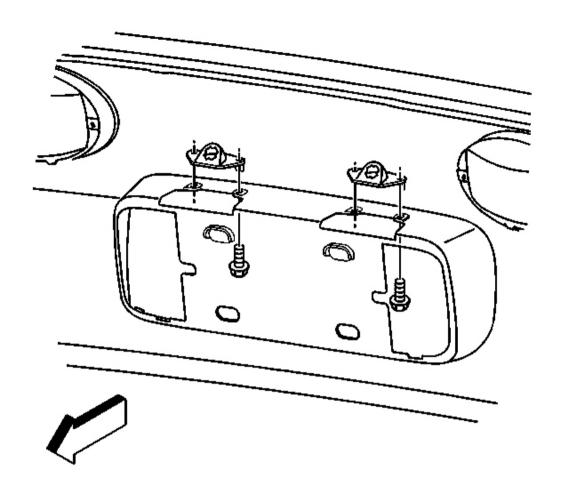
License Lamp Assembly To Tail Lamp Opening Courtesy of GENERAL MOTORS CORP.
